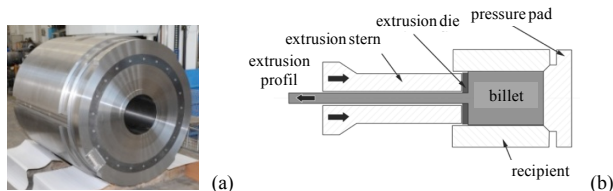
(A) EXTRUSION RECIPIENT AND (B) INDIRECT EXTRUSION PROCESS [10], [12], [13].
